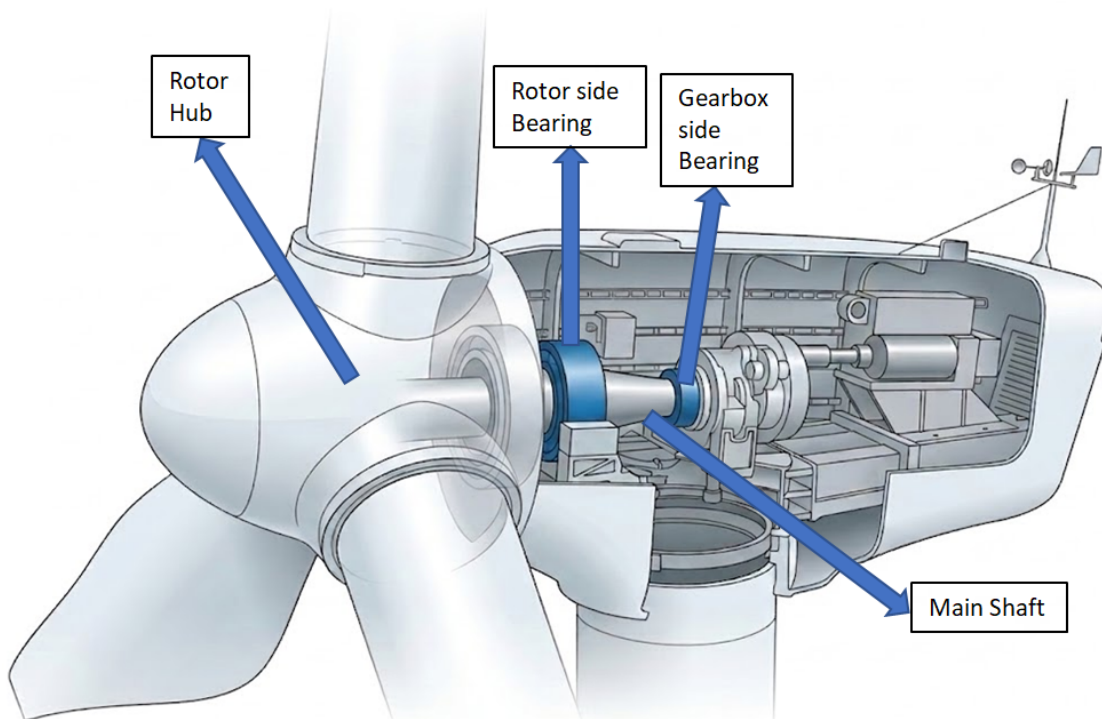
Generic Image of Wind Turbine Bearing Assembly
